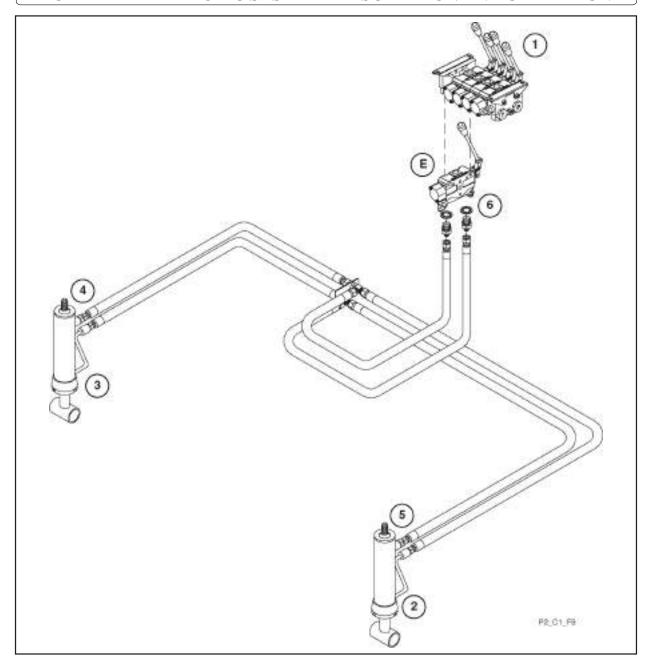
STABILISER CIRCUIT COMPONENT LAYOUT
